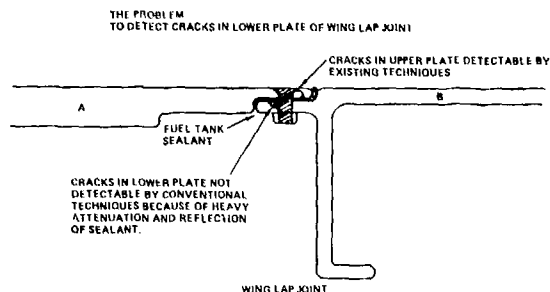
The problem: to detect cracks in the lower plate of a wing lap joint.
